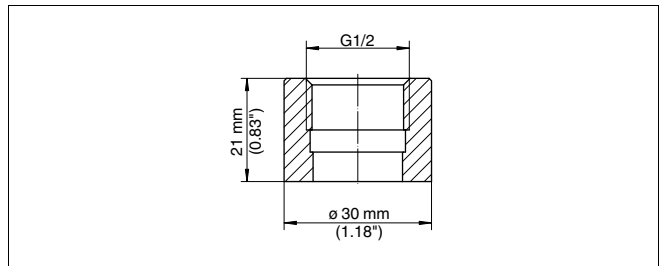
Dimensions welded socket thread G $\frac{1}{2}$  B acc. to ISO 228-1 - pipeline
